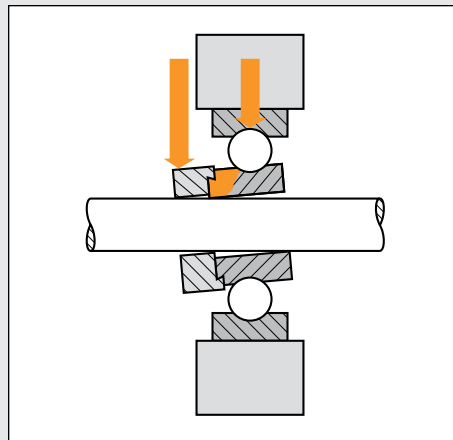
A. Shaft below suggested tolerance levels.
